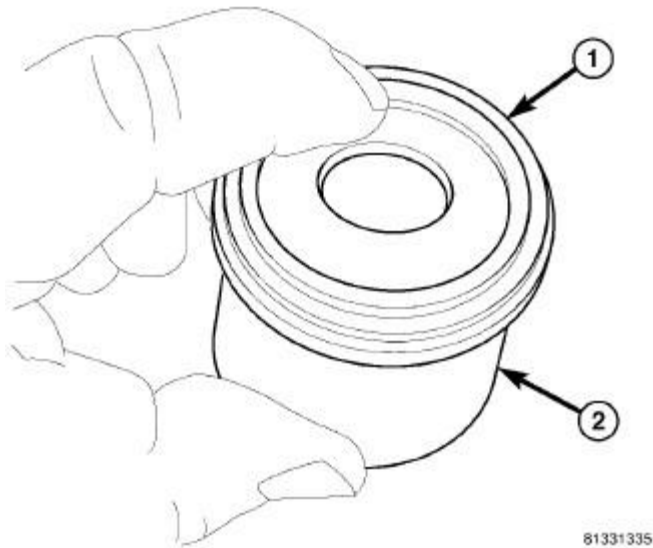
INSTALL BOOT ON CALIPER PISTON
